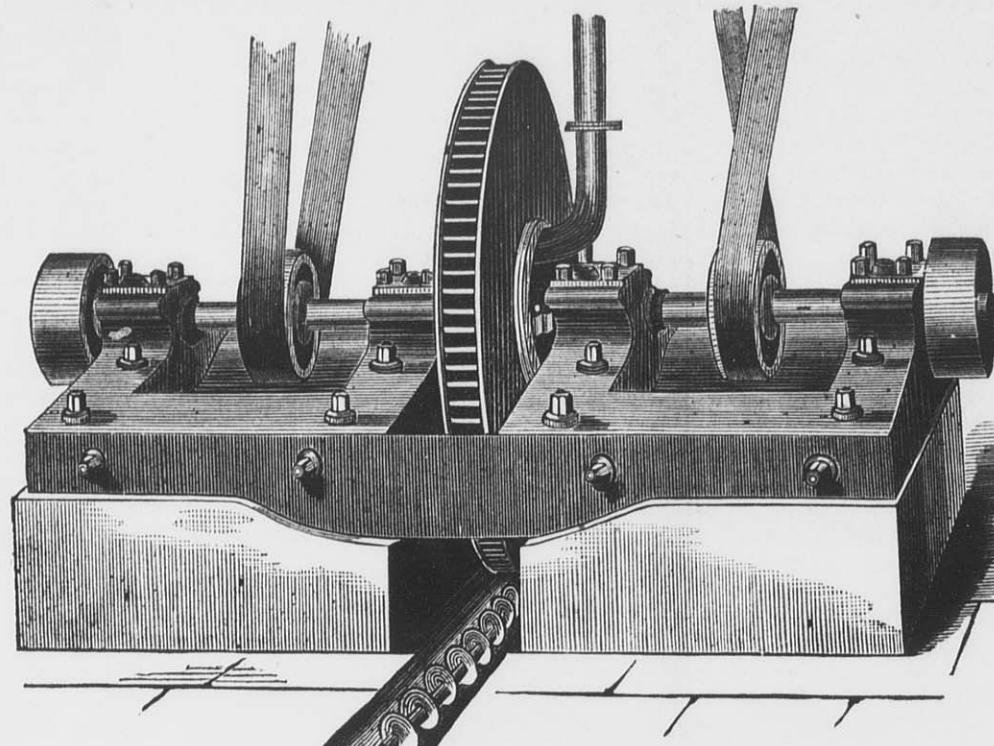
CARR'S ORIGINAL DISINTEGRATING FLOUR MILL—ELEVATION.
